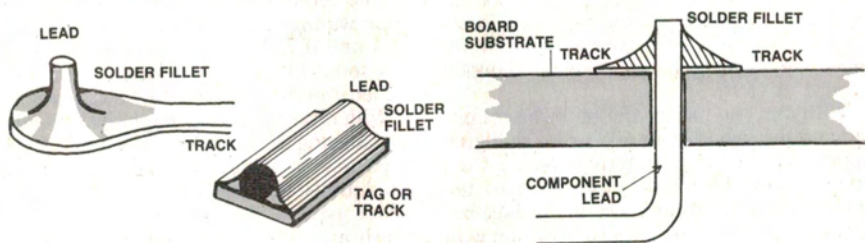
A good joint will be covered by a small fillet of solder which meets the parts of the joint at a tangent. The solder should be smooth and bright.
